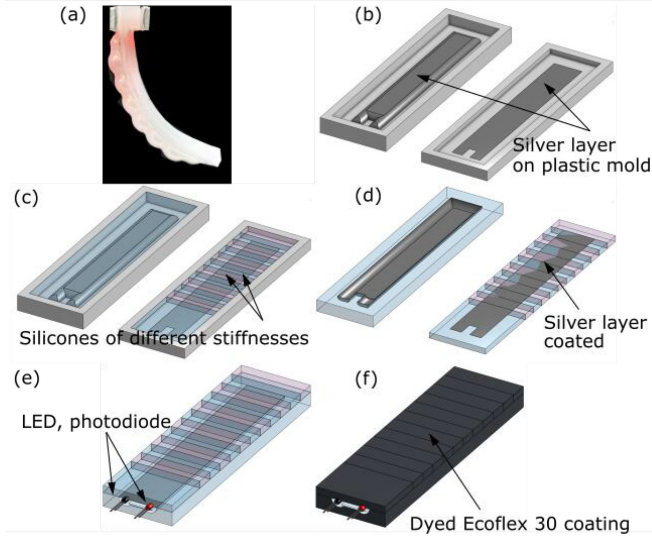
Fabrication process for the integration of pneumatic actuator and optic sensing. (a) Real prototype of the actuator. (b) Vapor deposition of silver on the spin coated elastomer on the surface of the plastic molds. (c) Pouring two silicone materials to the mold for different stiffnesses for the bending motion. (d) After separation from the mold, silver layers adhere on the molded elastomer. It includes two branches for LED and photodiode for preventing direct transmission of the light. (e) Attaching the two layers and putting LED, photodiode. (f) Coating the whole structure with dyed flexible elastomer for blocking ambient light.
